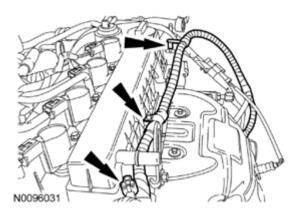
Locating Wiring Harness Retainers Of Valve Cover Courtesy of FORD MOTOR CO.
